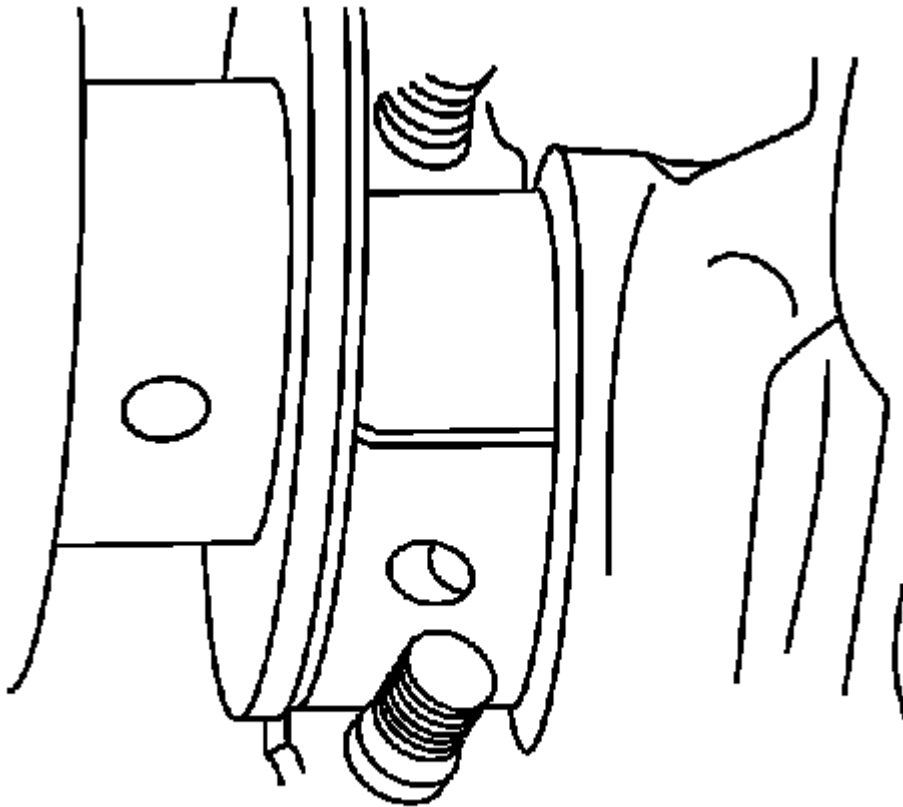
View Of Gaging Plastic Installed On Crankshaft Journal
